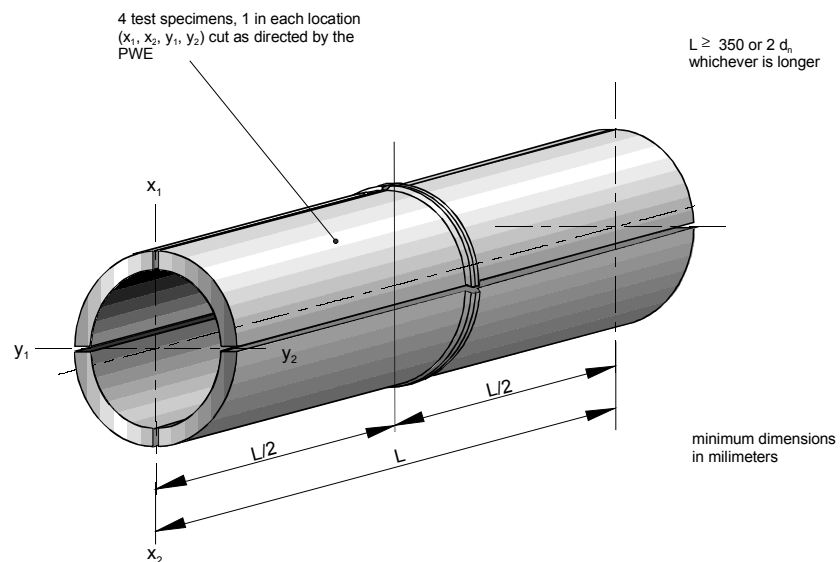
Test piece for a butt weld on pipe (for bend or tensile test specimens)
